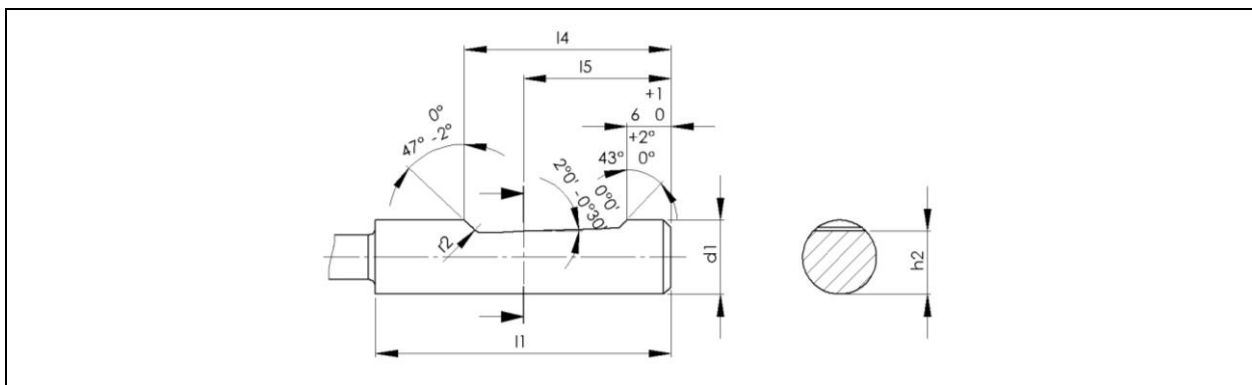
Dimensions for tools with cylindrical shaft with inclined surface
